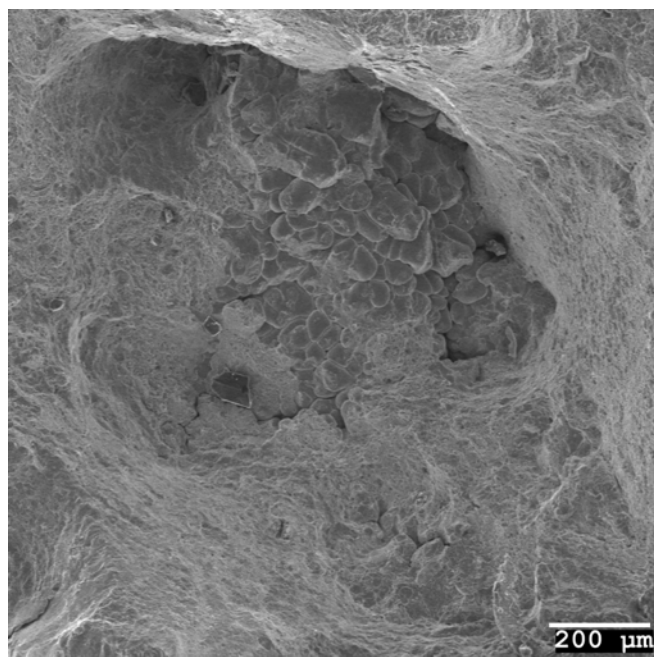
Lower Pore on a Stress Control Cylinder with Disc Specimen, $S_a = 392$ MPa (Specimen H5)
